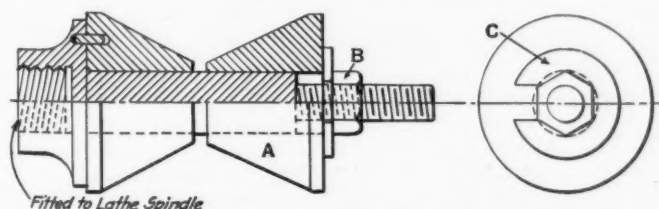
Expansion Arbor for Turning Side Rod Bushings.
